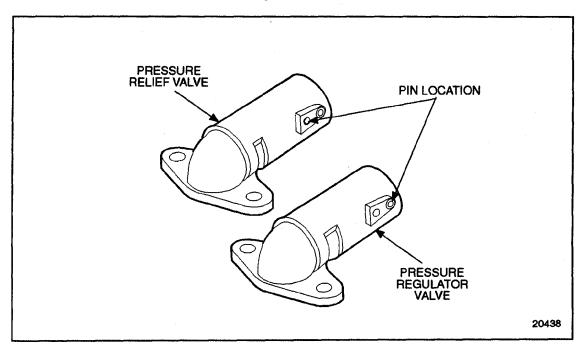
Comparison of Pressure Regulator and Relief Valve Assemblies
